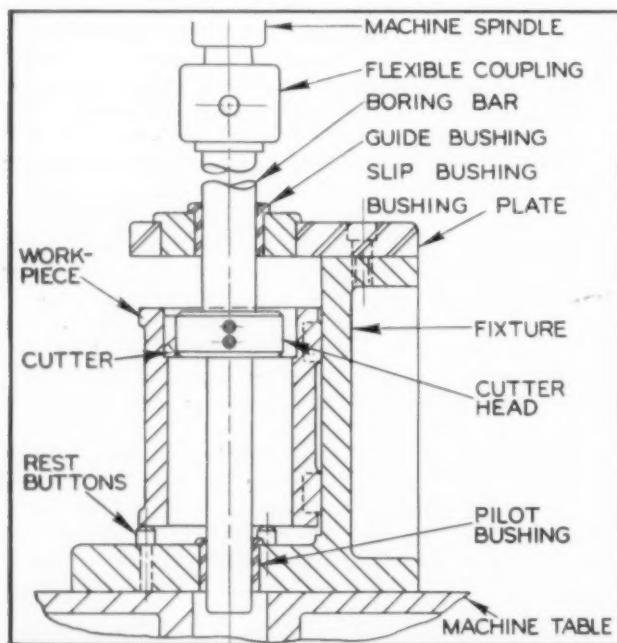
Suggested design of fixture for accurate boring on a machine—such as a drill press—having a loose spindle. The workpiece used for purpose of illustration is an open-end cylinder provided with mounting feet. Clamping is not shown, being incidental to the theme. The cutting tool is held in a cutter head, which is pressed on the bar and shouldered above the cutter head to take thrust. The bar is piloted both ends, with a flexible coupling interposed between the bar and the spindle; thus, the bar has practically perfect alignment regardless of spindle play. Note that the upper guide bushing is held in a slip bushing of larger diameter than the bore of the workpiece so as to permit passage of the cutter head. As the bar is retracted the cutter head lifts up the slip bushing, the whole thereby clearing the fixture for unloading and loading.
